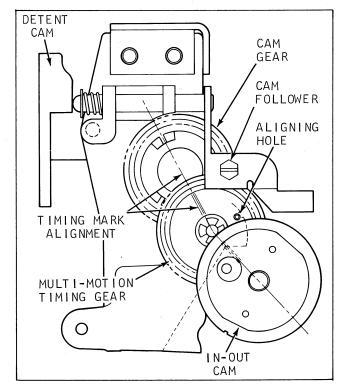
Figure E. Timing and Installing the Multi-Motion Gear and Cam Assembly
